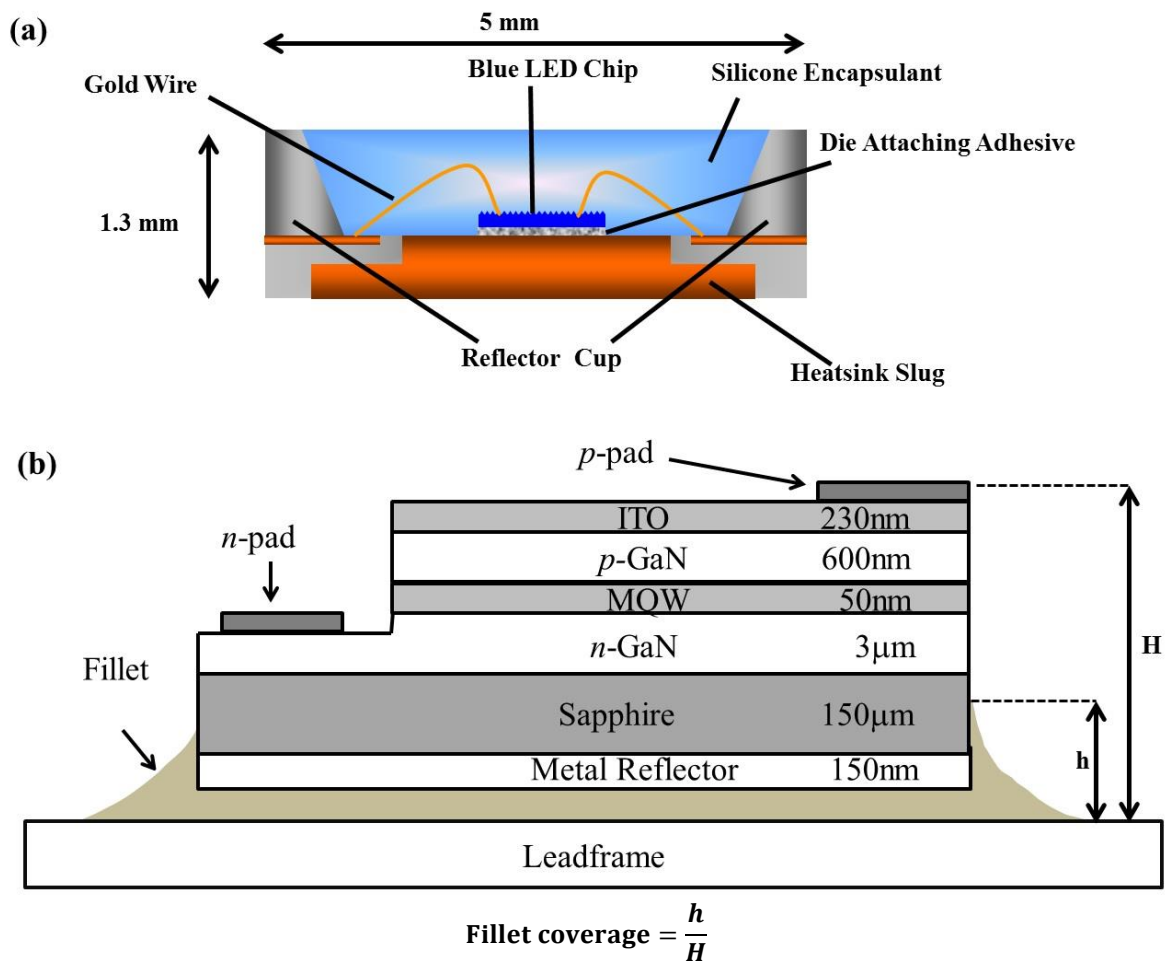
(a) Schematic drawing of the cross-sectional view of a monochromatic blue LED package with silicone encapsulant; (b) a macroscopic enlargement of the chip and the DAA layer.
